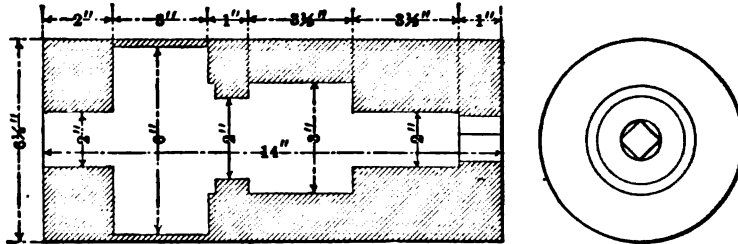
Typical piece of work especially adapted to rapid reduction by use of multiple tools, rather than forging approximately to size and then finishing on lathe.
